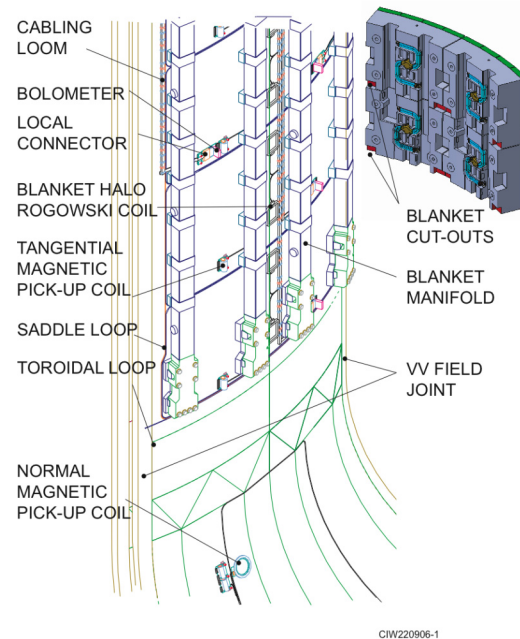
Part of the inboard vacuum vessel with blanket and divertor removed, showing installed diagnostic sensors and cabling looms.
